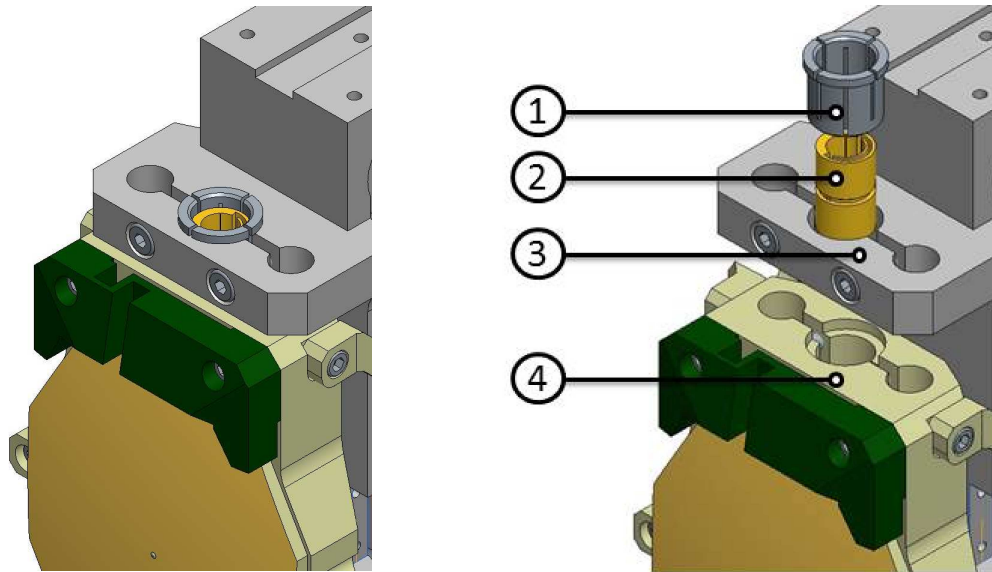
Left: Close up of pivot clamp construction in HIFI-FPC frame and mirror. Right: Exploded view of pivot clamp construction; 1 = Clamping bush; 2 = Flexural pivot; 3 = clamp construction in frame; 4 = clamp construction in mirror.
